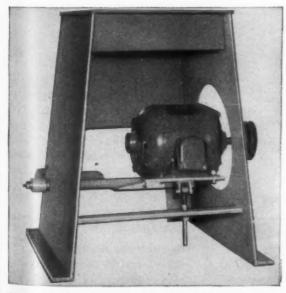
Costs Were Cut from \$83.13 to \$39.00 by converting the design of this shoe perforating machine base to all-welded steel Welded design cut weight from 269 lbs. to 176 lbs. and increased strength of the base 50%.
